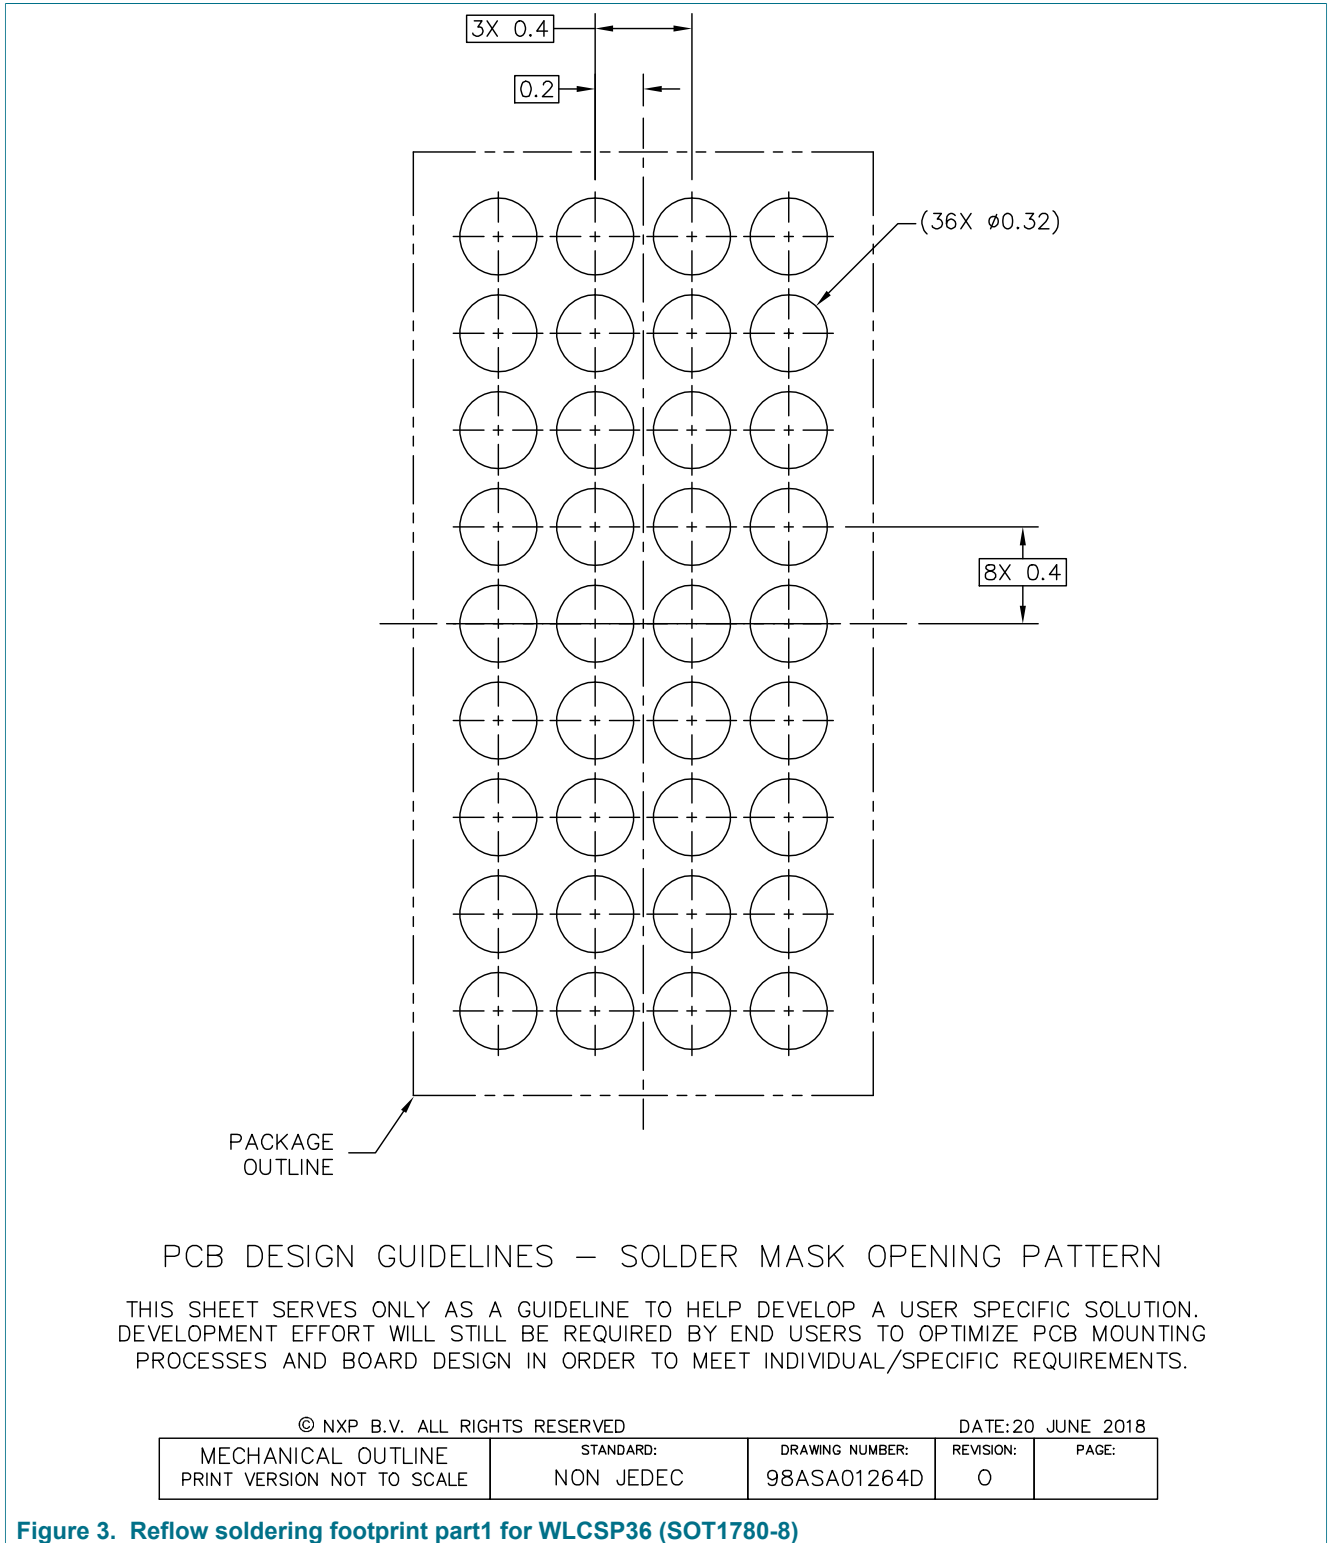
Reflow soldering footprint part1 for WLCSP36 (SOT1780-8)
